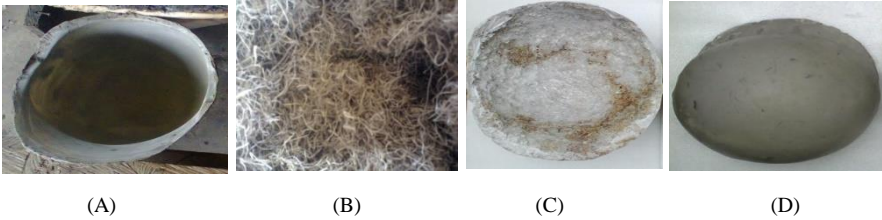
Helmet production processes (A)Helmet open mould; (B)Treated chopped fibre; (C) Internal surface of helmet pattern; (D) External surface of helmet pattern. (Source: Ademoh and Olasoji, 2015)
